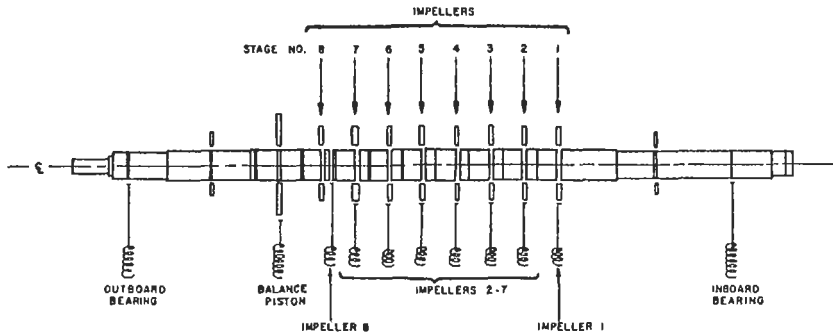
Pump rotor model showing locations of all 11 effective bearings.
